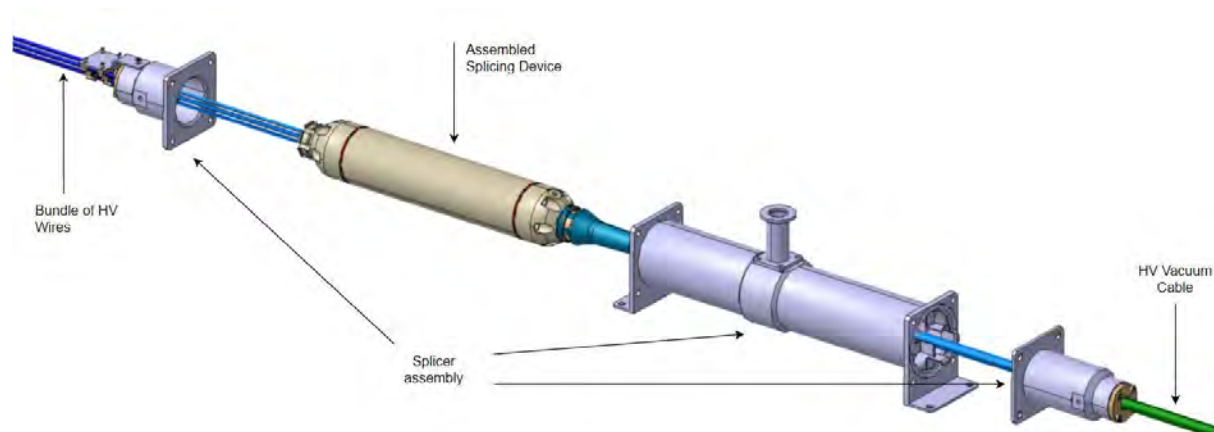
Overview of the Splicing Device and Splicer assembly.
